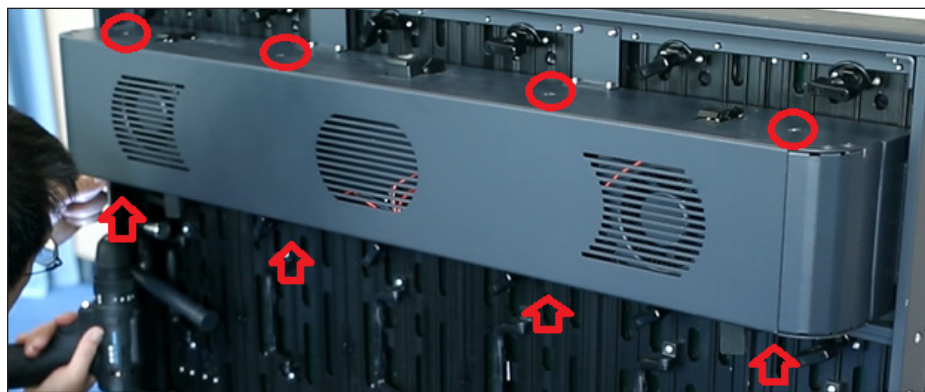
Remove Screws Securing Hub Board to Power Box
